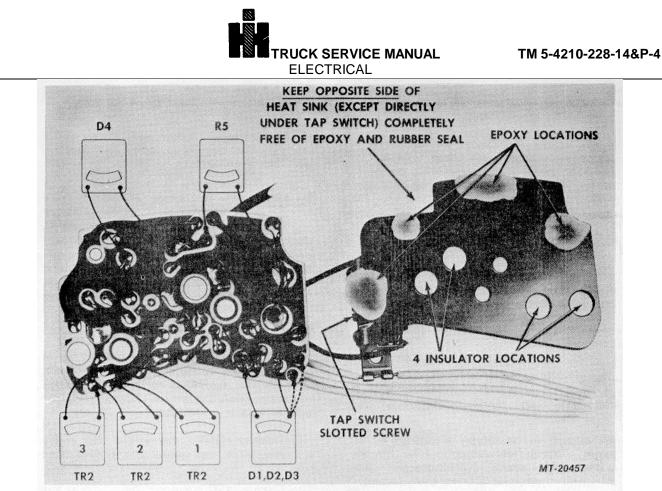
Checking Regulator Components (Regulator Shown in Fig. 12)
